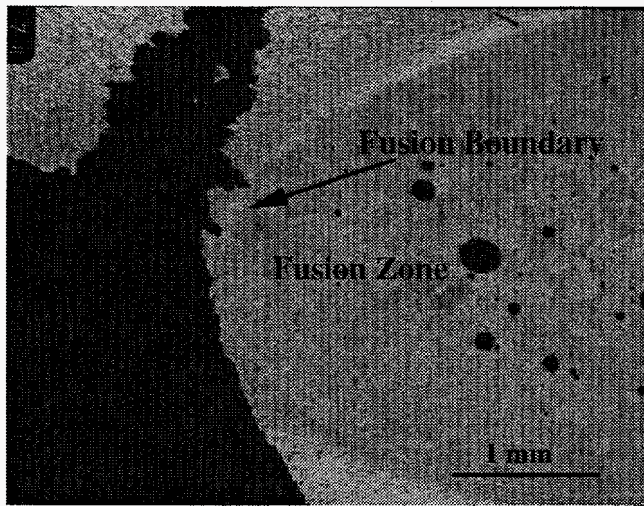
Filler metal resistance spot welding joint. Fractured in the base metal along brazing-bonded corona. The base metal is a 3.2 mm thick 6061 aluminum sheet.
